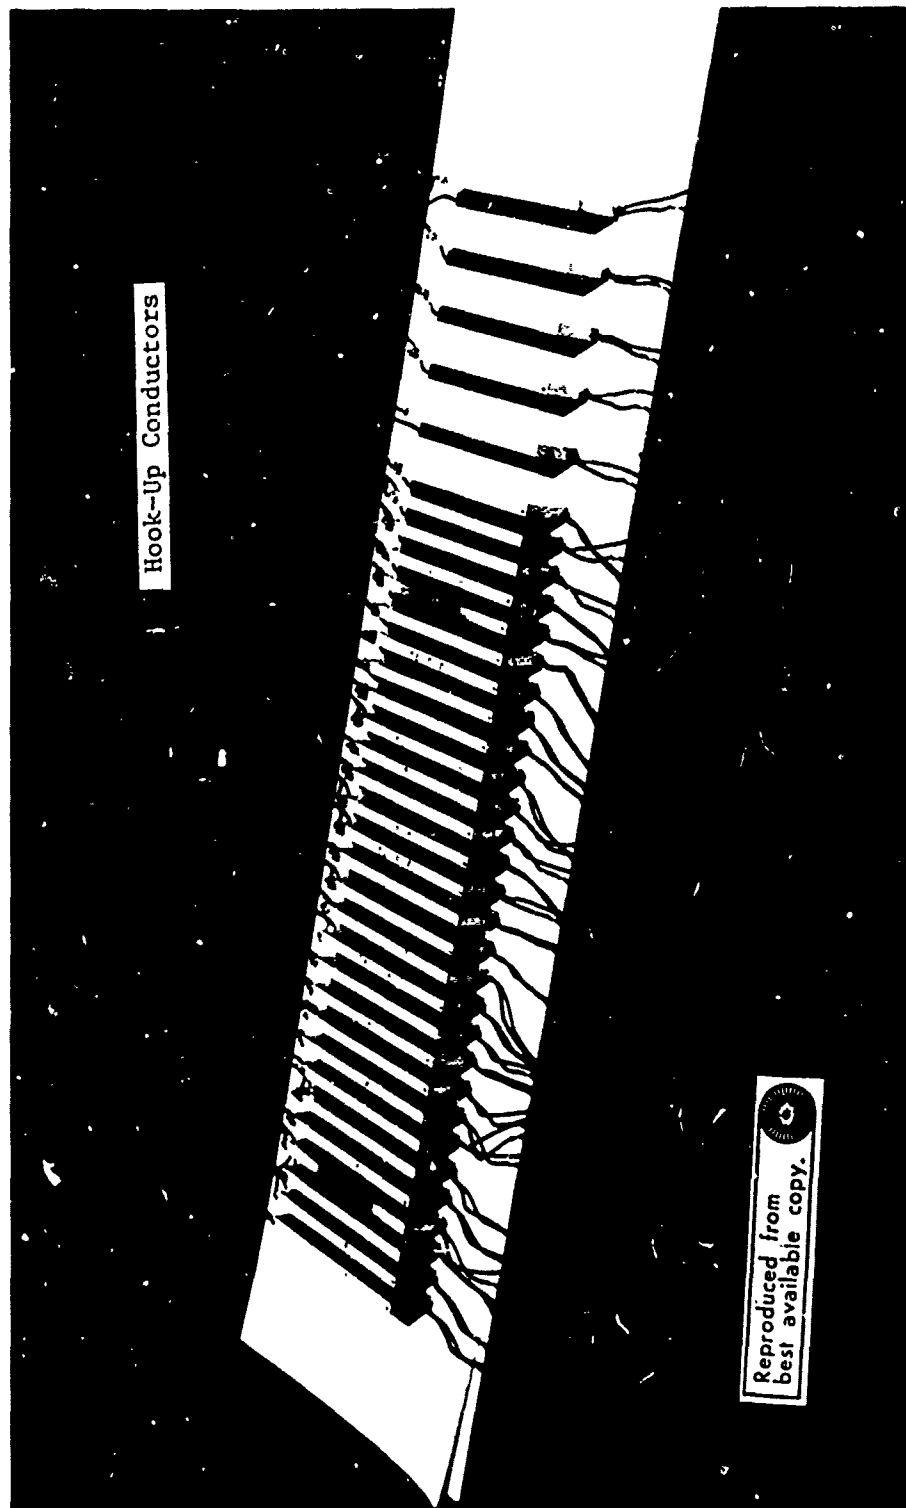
ARRAY PARTIALLY ASSEMBLED
